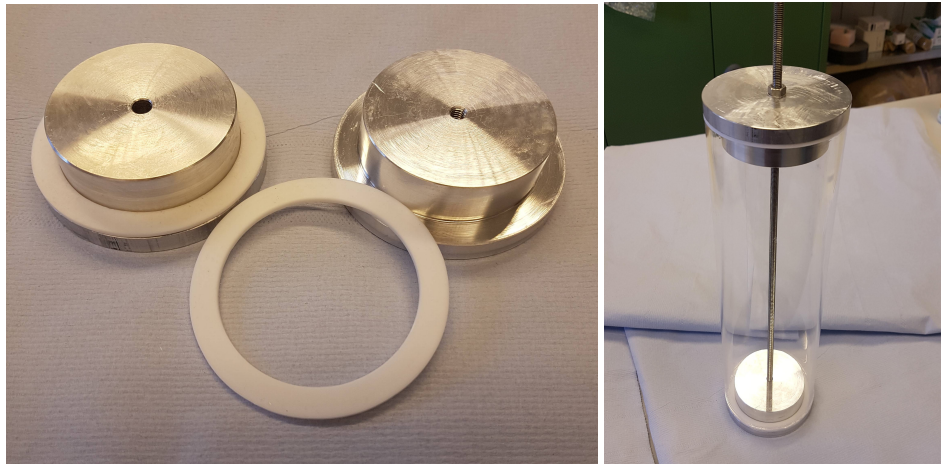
(left) The pieces that hold and seal the large diameter tube for coating. (right) The same holders holding a short piece of tube for illustration.
